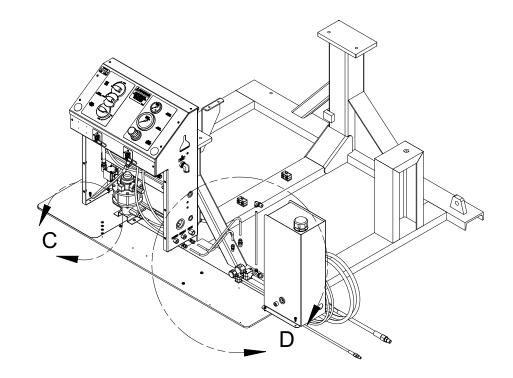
USV-16-200T HYDRAULIC TANK ASSEMBLY (P/N 91593)
